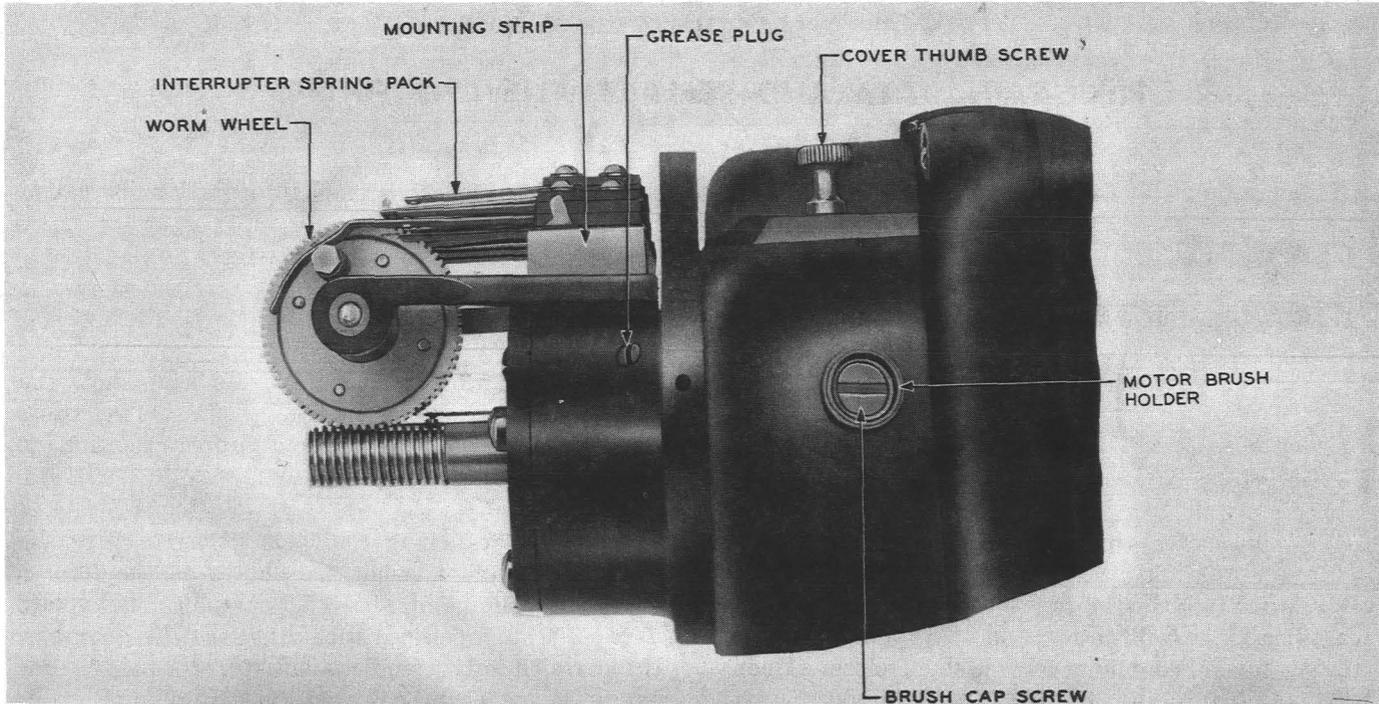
Interrupter End (Holtzer-Cabot Machines)
